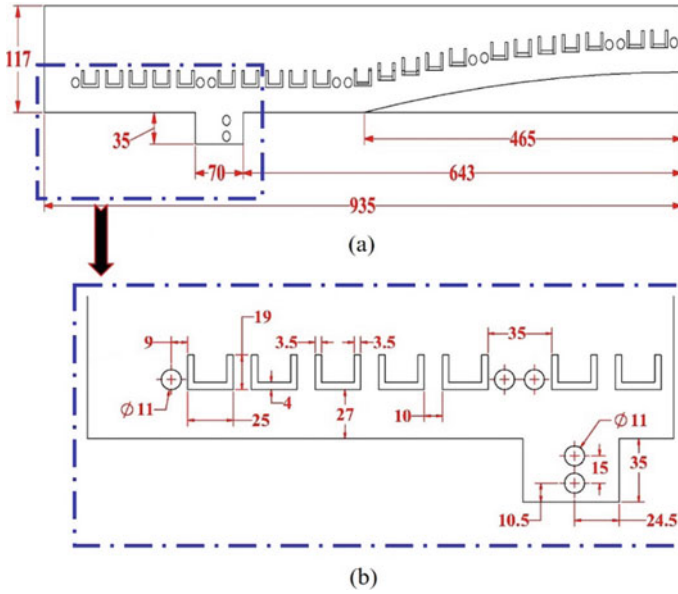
Dimensions of cooling water channel holes and slots (a) Section at the meniscus region. (b) Channel dimensions
